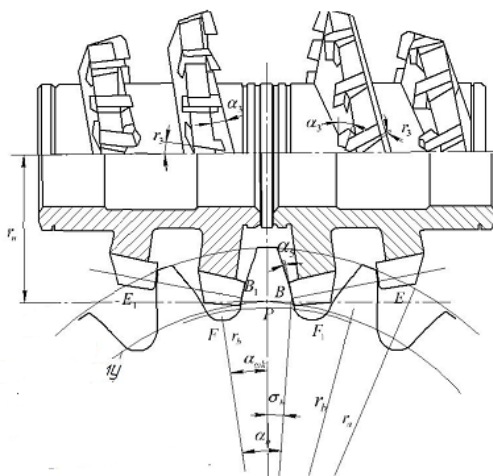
A scheme of machining the wheel with cutter bodies with different directions of turns
